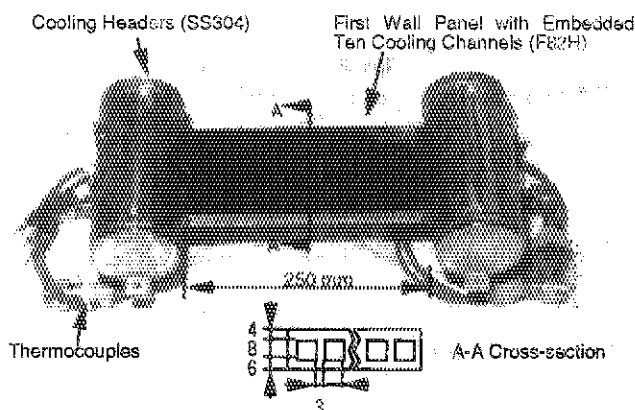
F82H first wall panel fabricated by HIP bonding method.
